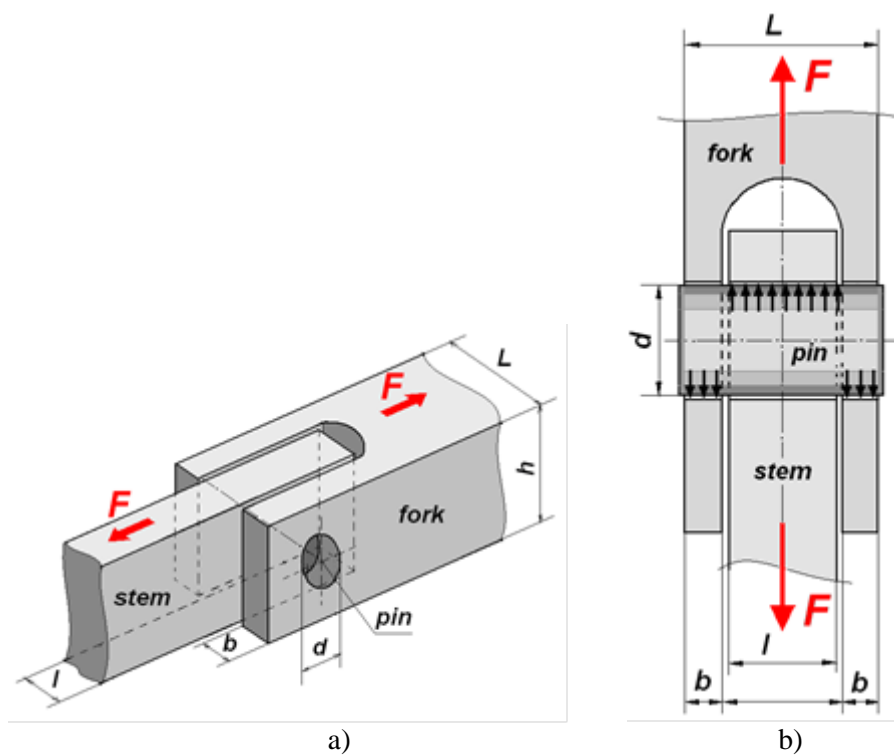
Connection between the articulated beam GSA-1250S and spacer GSA-570S [15] a) Connection elements assembly: “fork-stem-pin” b) Pin loading
